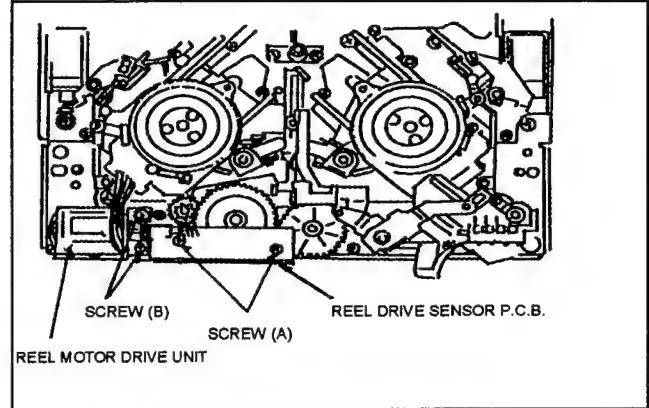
Removal of Reel Drive Motor Unit
